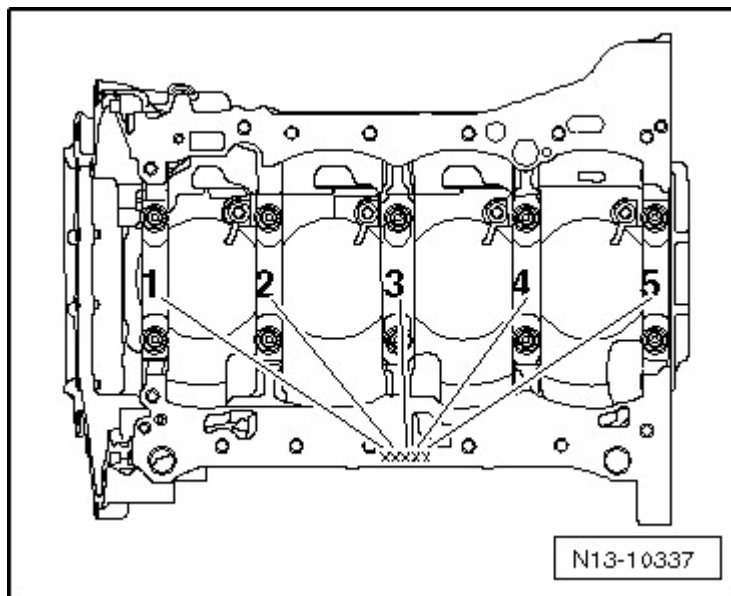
Locating Cylinder Block Identification On Top (Transmission Side) Of Cylinder Block
